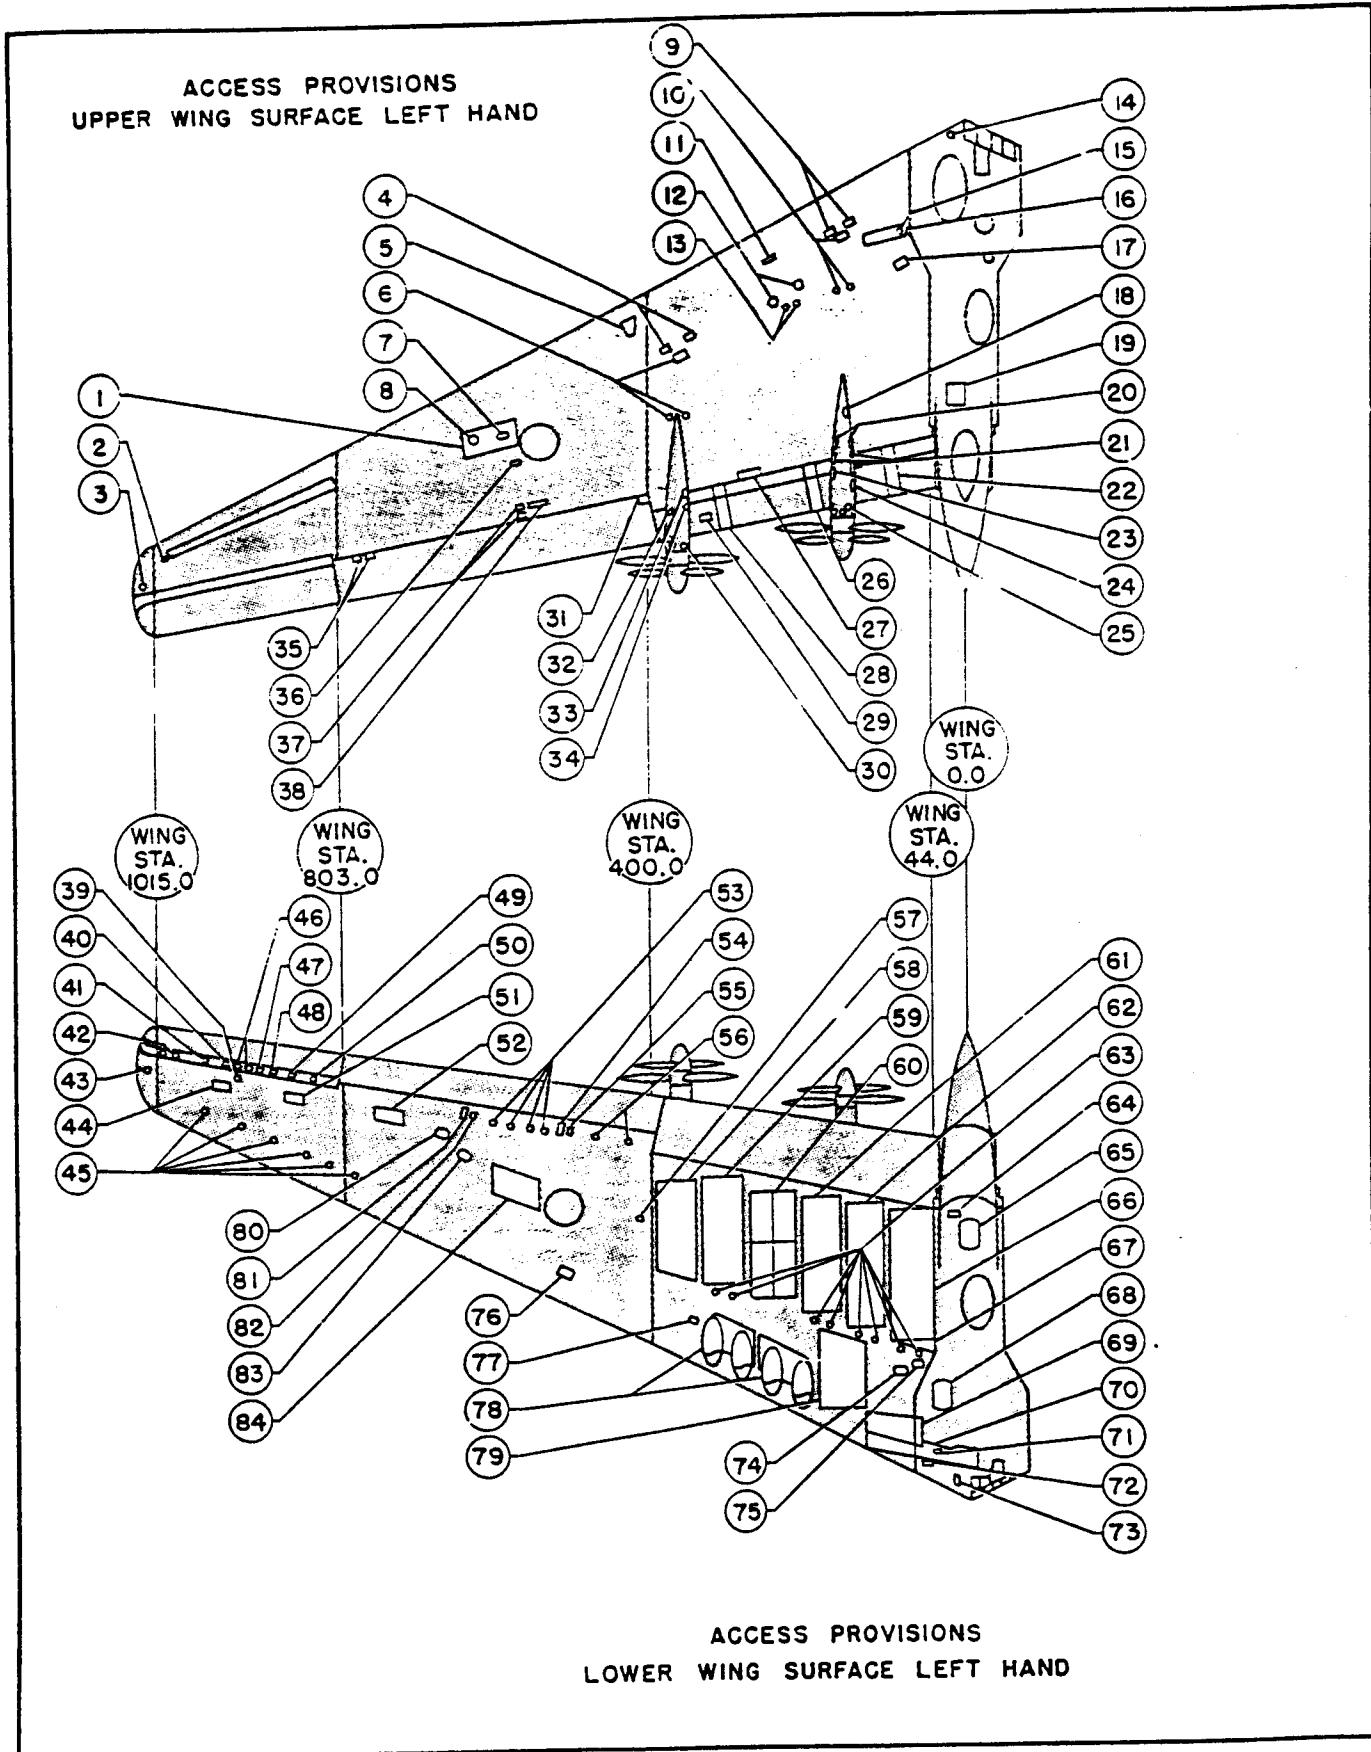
Access Provisions (Sheet 1 of 2 Sheets)
